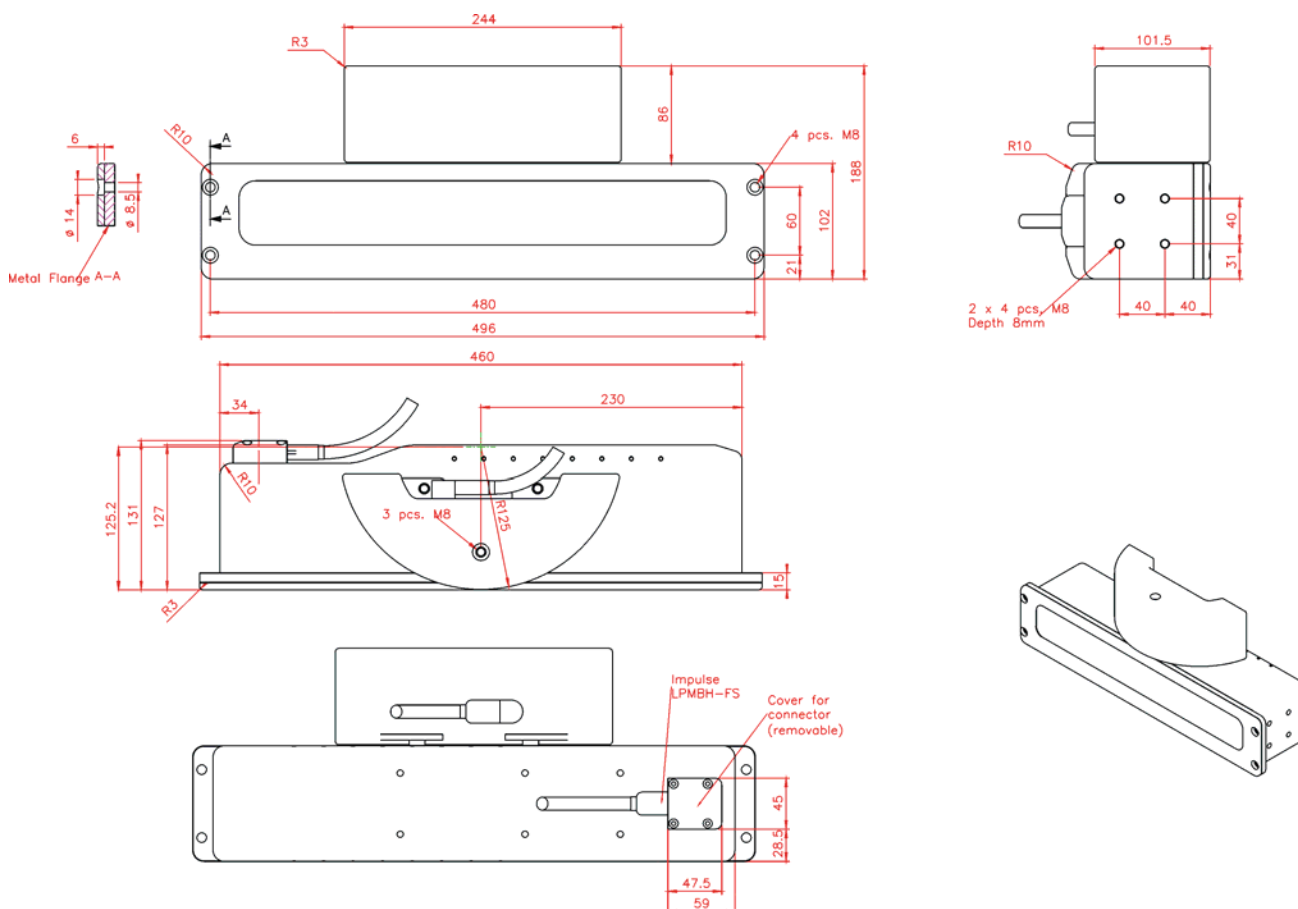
Outline dimension drawing of the SB7128 system, composed of the EM7200 receiver unit and the TC2162 projector.
